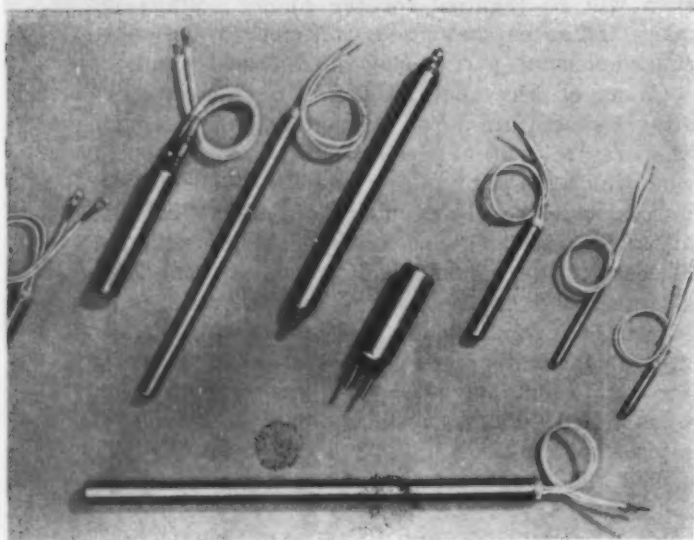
Cartridge heating units inserted in "shoes" of compressive shrinking machine provide controlled heat for preshrinking processed cloth
